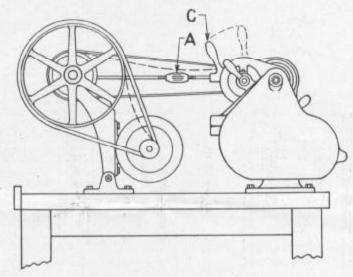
Setting the drive to get the proper belt measurement on the 9" Horizontal Drive.
